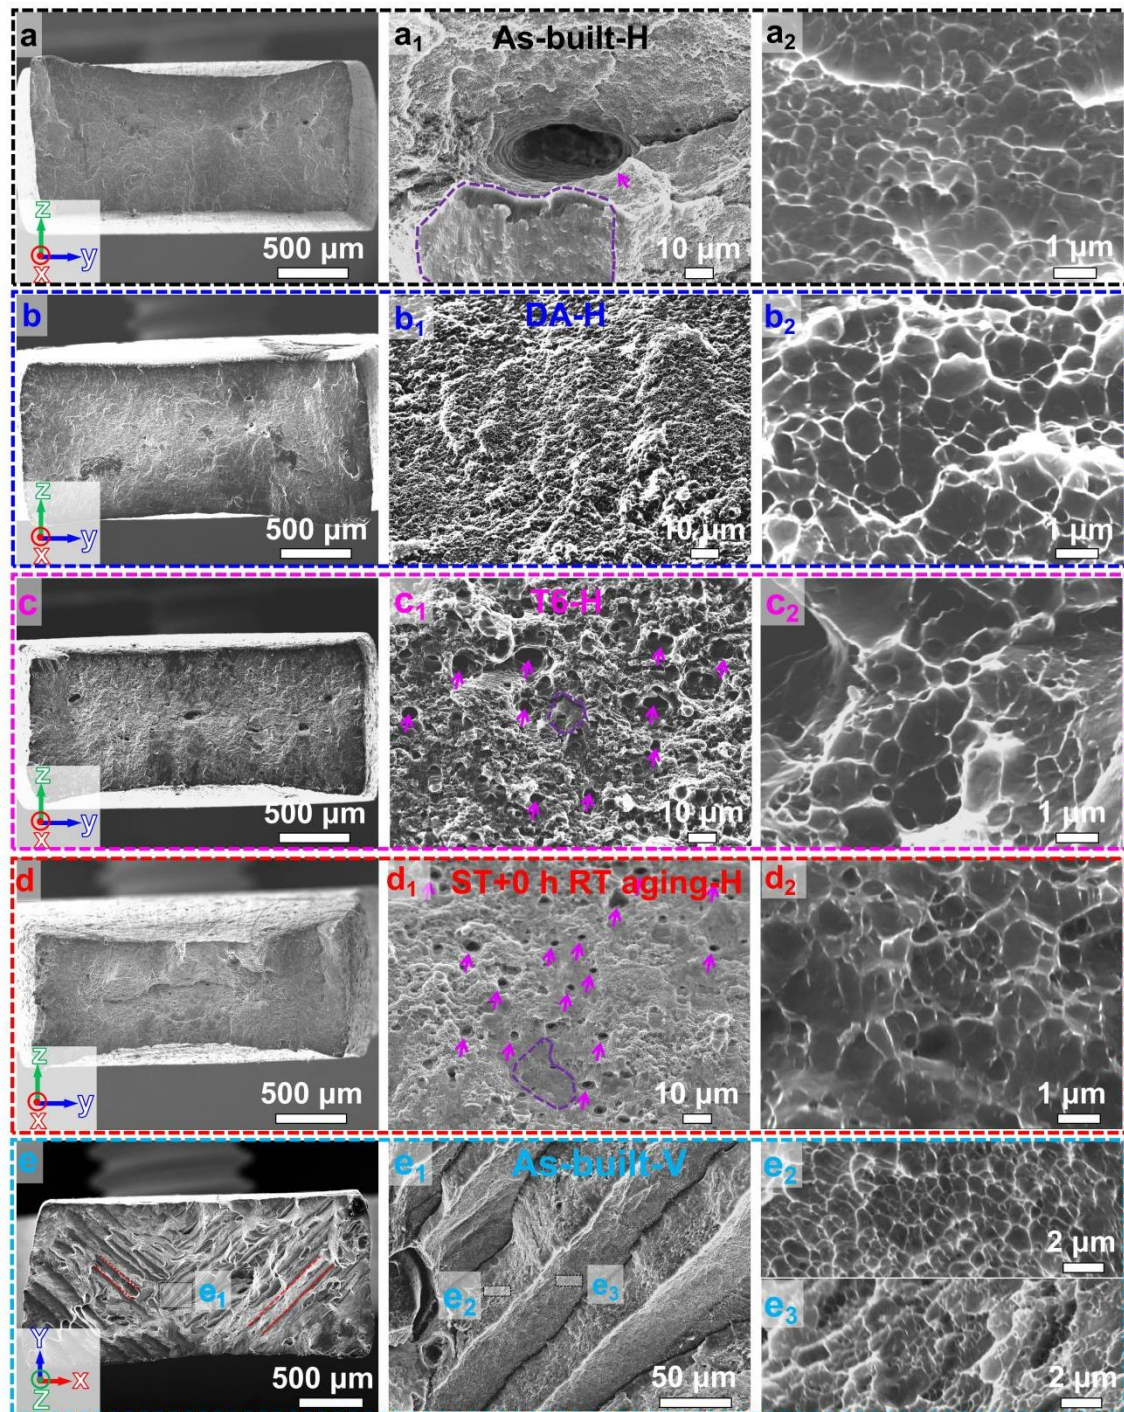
Fracture surface of L-PBF Al6061Mod with E297 under different conditions. (a) as-built sample in the horizontal direction; (b) DA sample at 350 °C/4h; (c) T6 sample; (d) ST samples; (e) as-built sample in the vertical direction.
